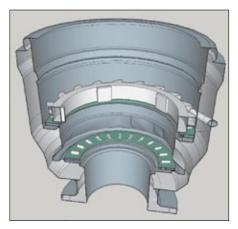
Turbine mechanism (sectional view) Rysunek 5. Mechanizm turbiny (przekrój)
